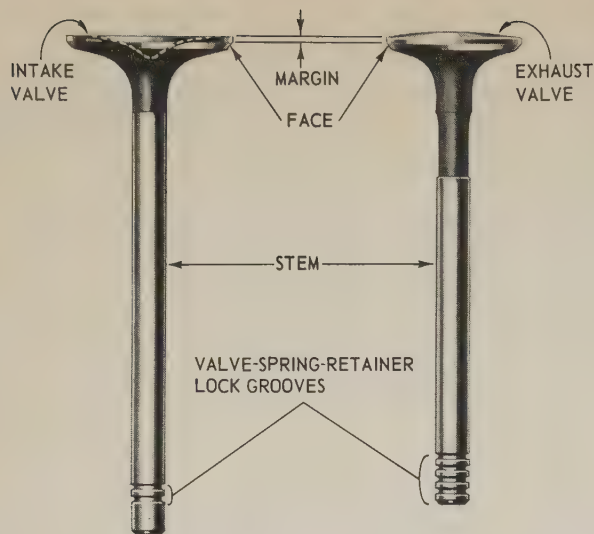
Typical engine valves. (Chrysler Corporation)
